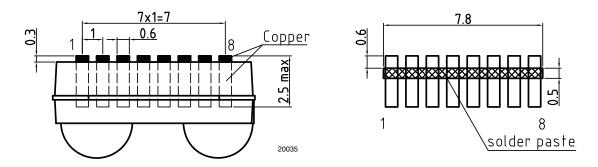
Recommended Footprint for Side View Applications and Solderpaste Mask
